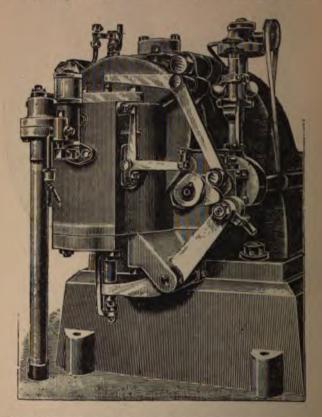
VALVE GEAR AND GOVERNOR, FORWARD GAS ENGINE.
